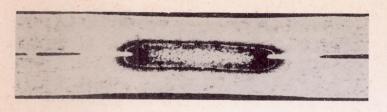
Spot welds from panels cleaned by wire brushing A.C. welds.
